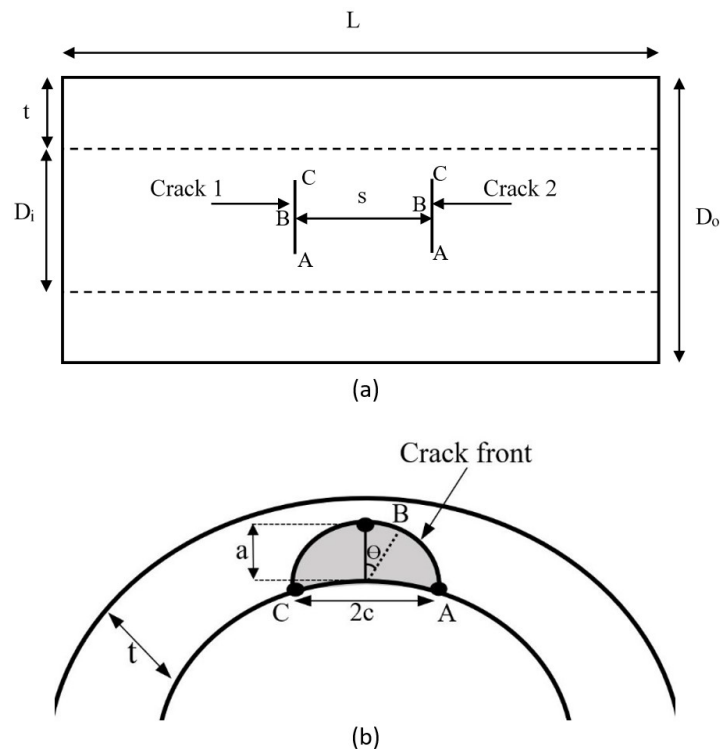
Parallel cracks configuration (a) topmost view (b) points on the crack front
